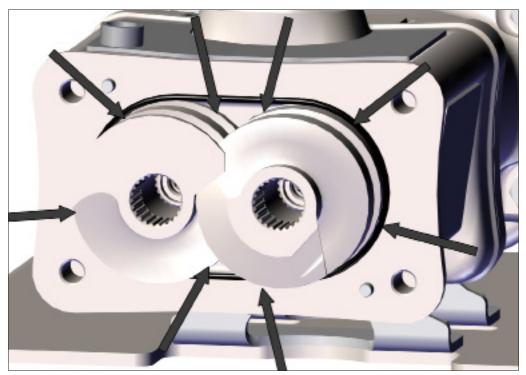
Put protective film around screw spindles during the assembling and dismantling work
